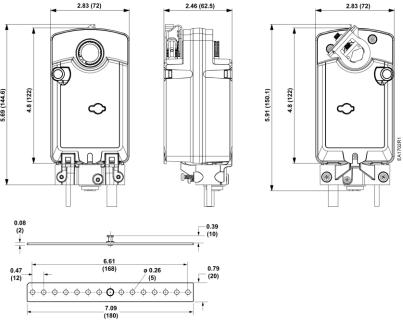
GJD Series Damper Actuator and Mounting Bracket Dimensions in Inches (Millimeters).
